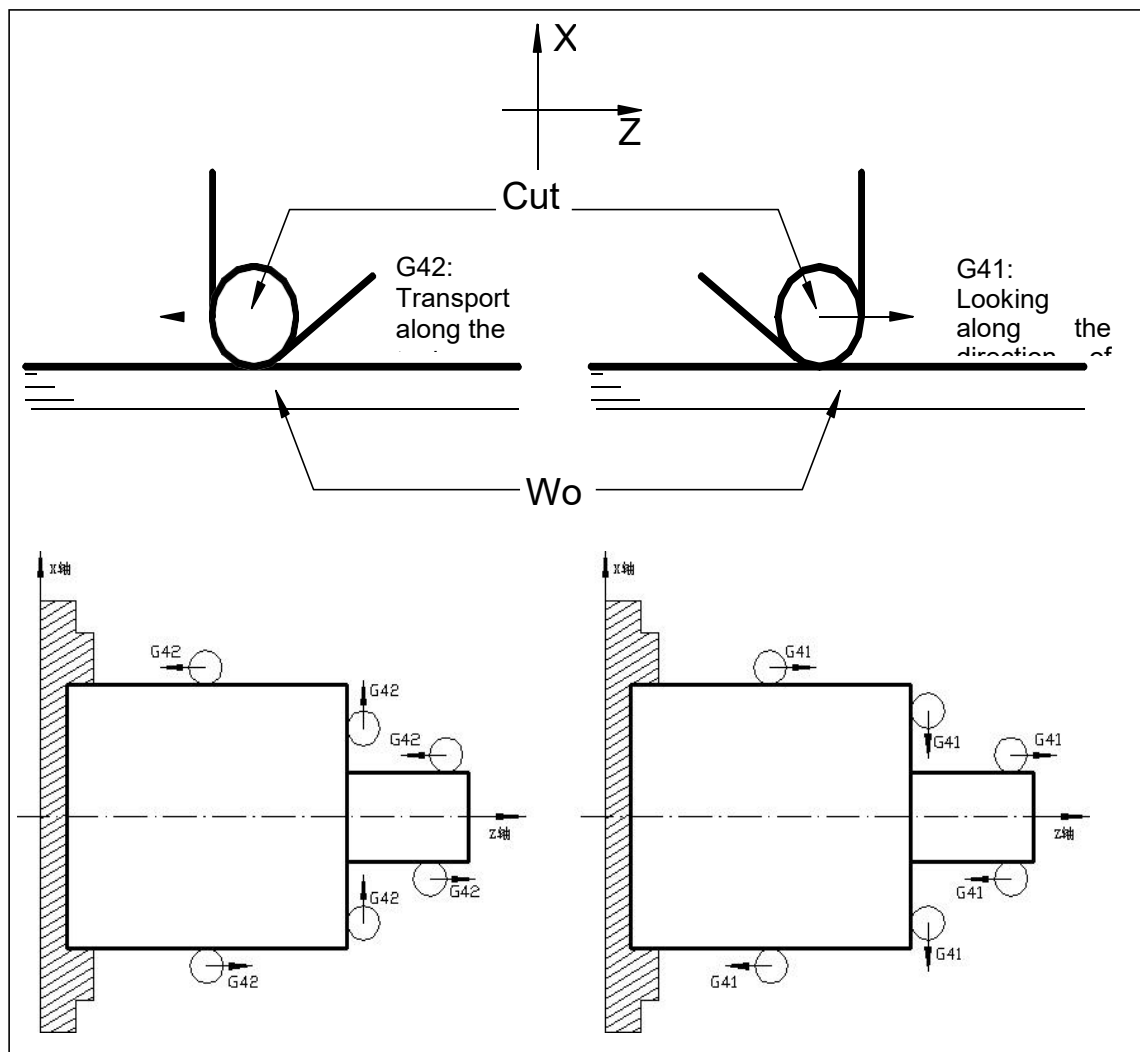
Compensation Direction of Rear Tool Holder Coordinate System
